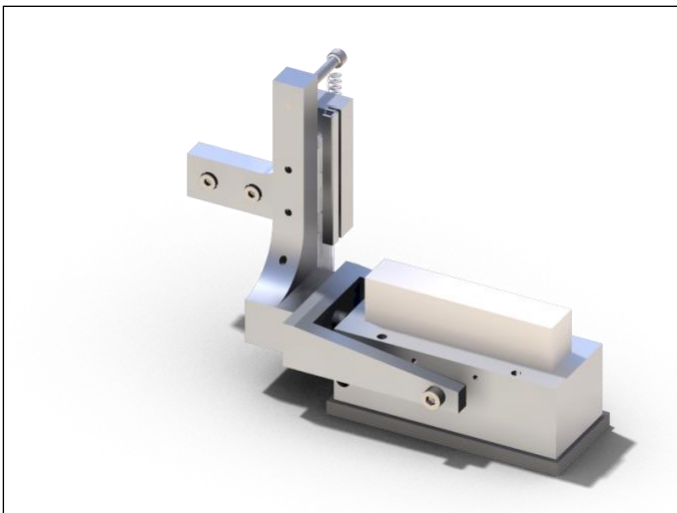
Probe holder for EF joints, with the probe/wedge assembly attached.
